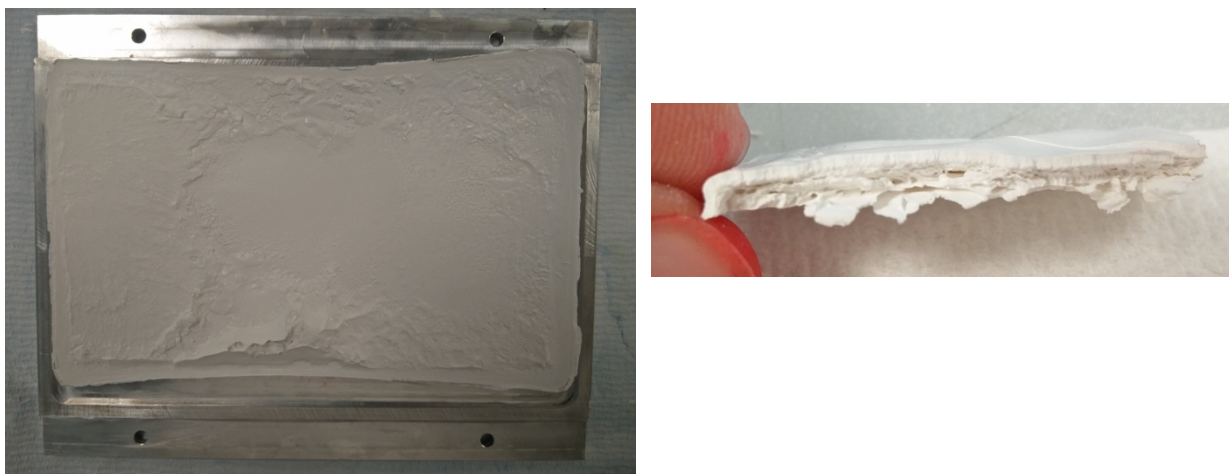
Left: Bottom side of the membrane casted in the Material U mould (dimensions: 9,5 x 16 cm); Right: Cross section of the membrane casted in Material M mould
